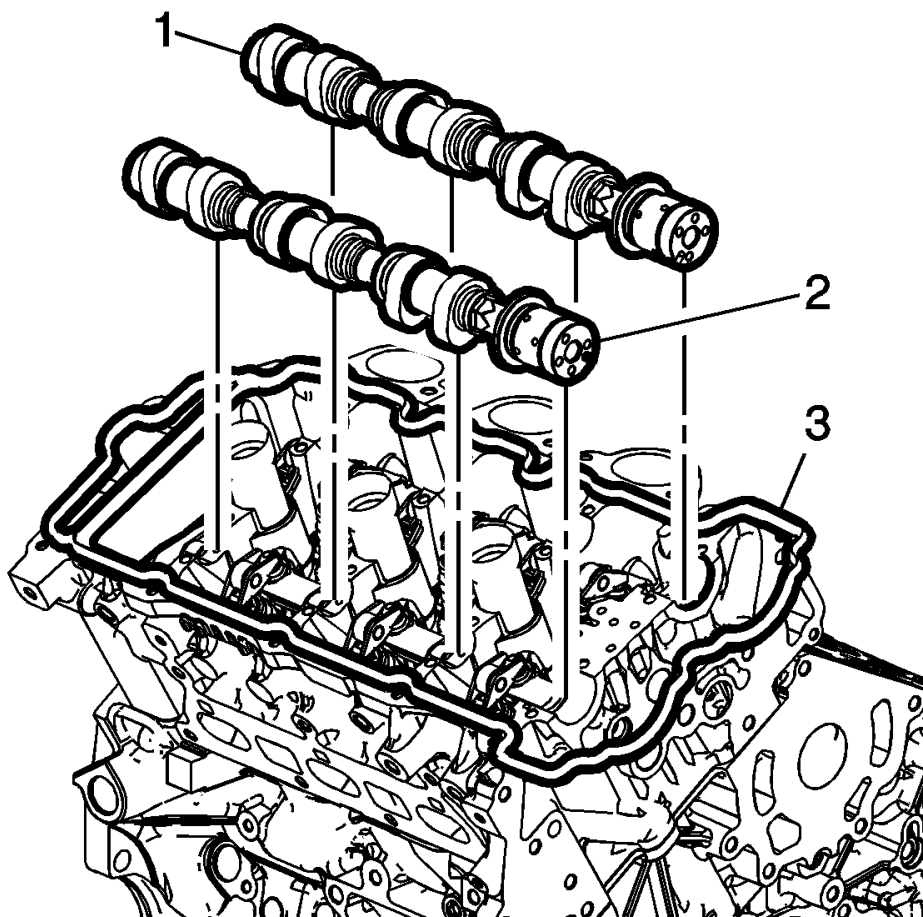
Right Cylinder Head Camshaft Intake & Exhaust Positioning Points
